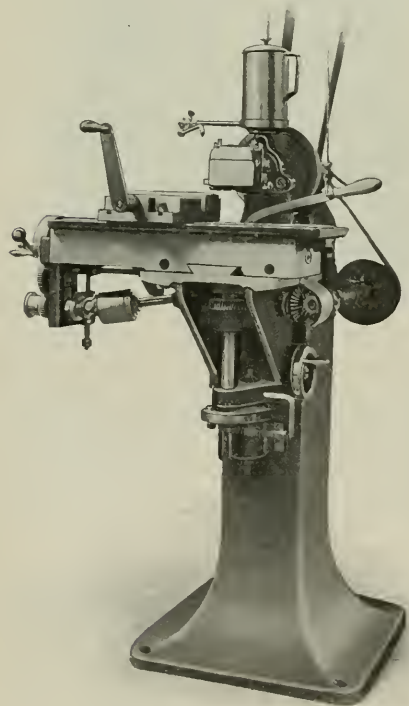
Sloan & Chace Automatic Rack Cutter.
